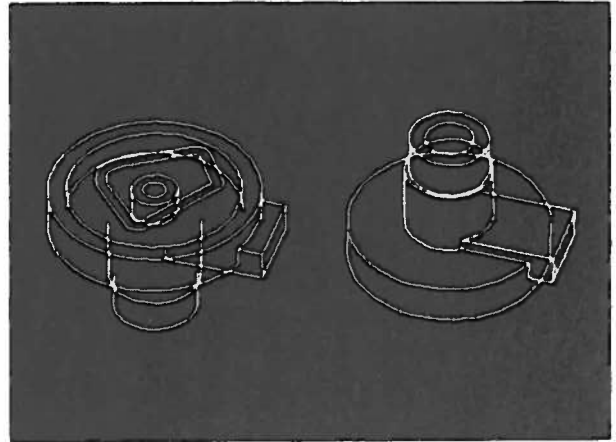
MODEL OF CASTING (BOTTOM AND TOP)
